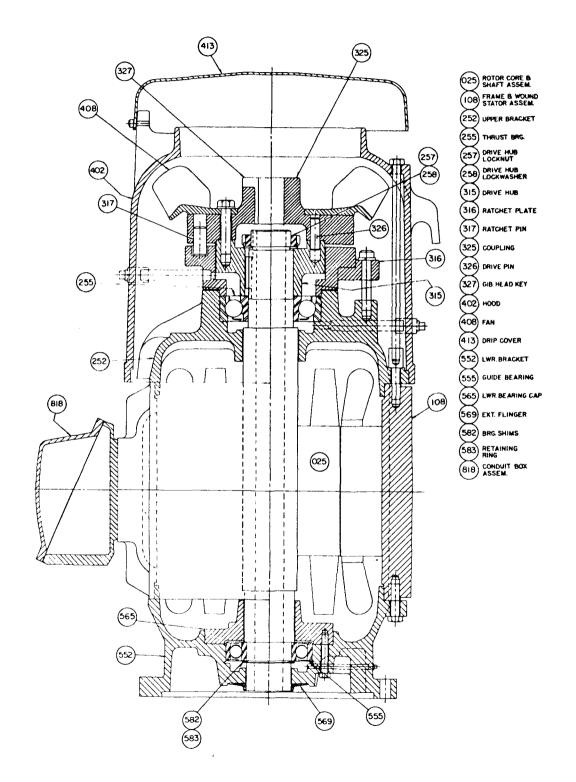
Arrangement of Parts, Vertical Hollow Shaft Fan-Cooled or Type T Life-Line Explosionproof Motor, Frames 210TP-280TP (Solid Shaft Motors use same Construction except Ratchet Pins are Omitted.)
